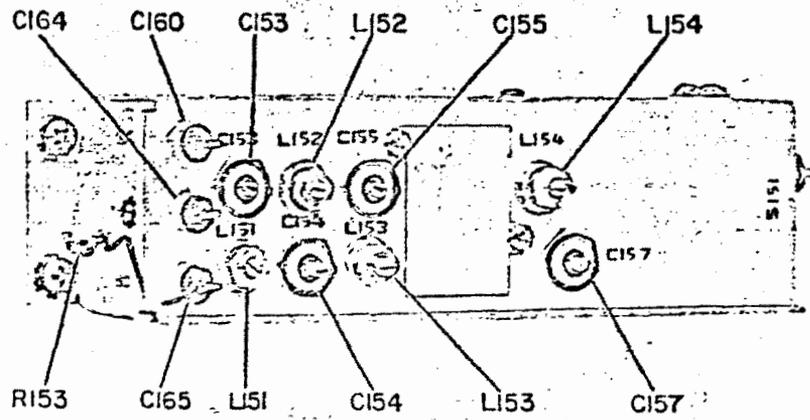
Preselector (Mixer Subassembly), Bottom View, Location of Parts
